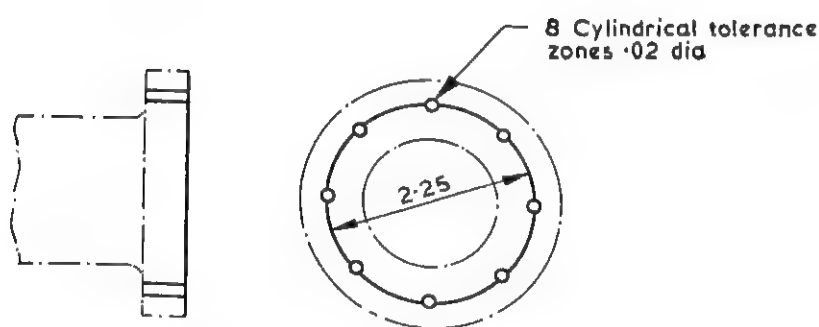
A group of holes toleranced in relation to a datum spigot and datum face is shown in Fig. 110 (a). The tolerance diagram in Fig. 110 (b) shows the positional requirements for the maximum metal condition of the holes and datum spigot. If any hole is finished away from its maximum metal limit there will, in effect, be an increase of positional tolerance for that hole. Furthermore, if the
